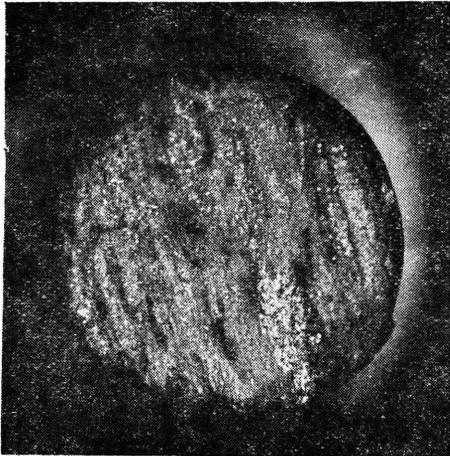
A fracture of tension test piece, 14. mm $\phi$
